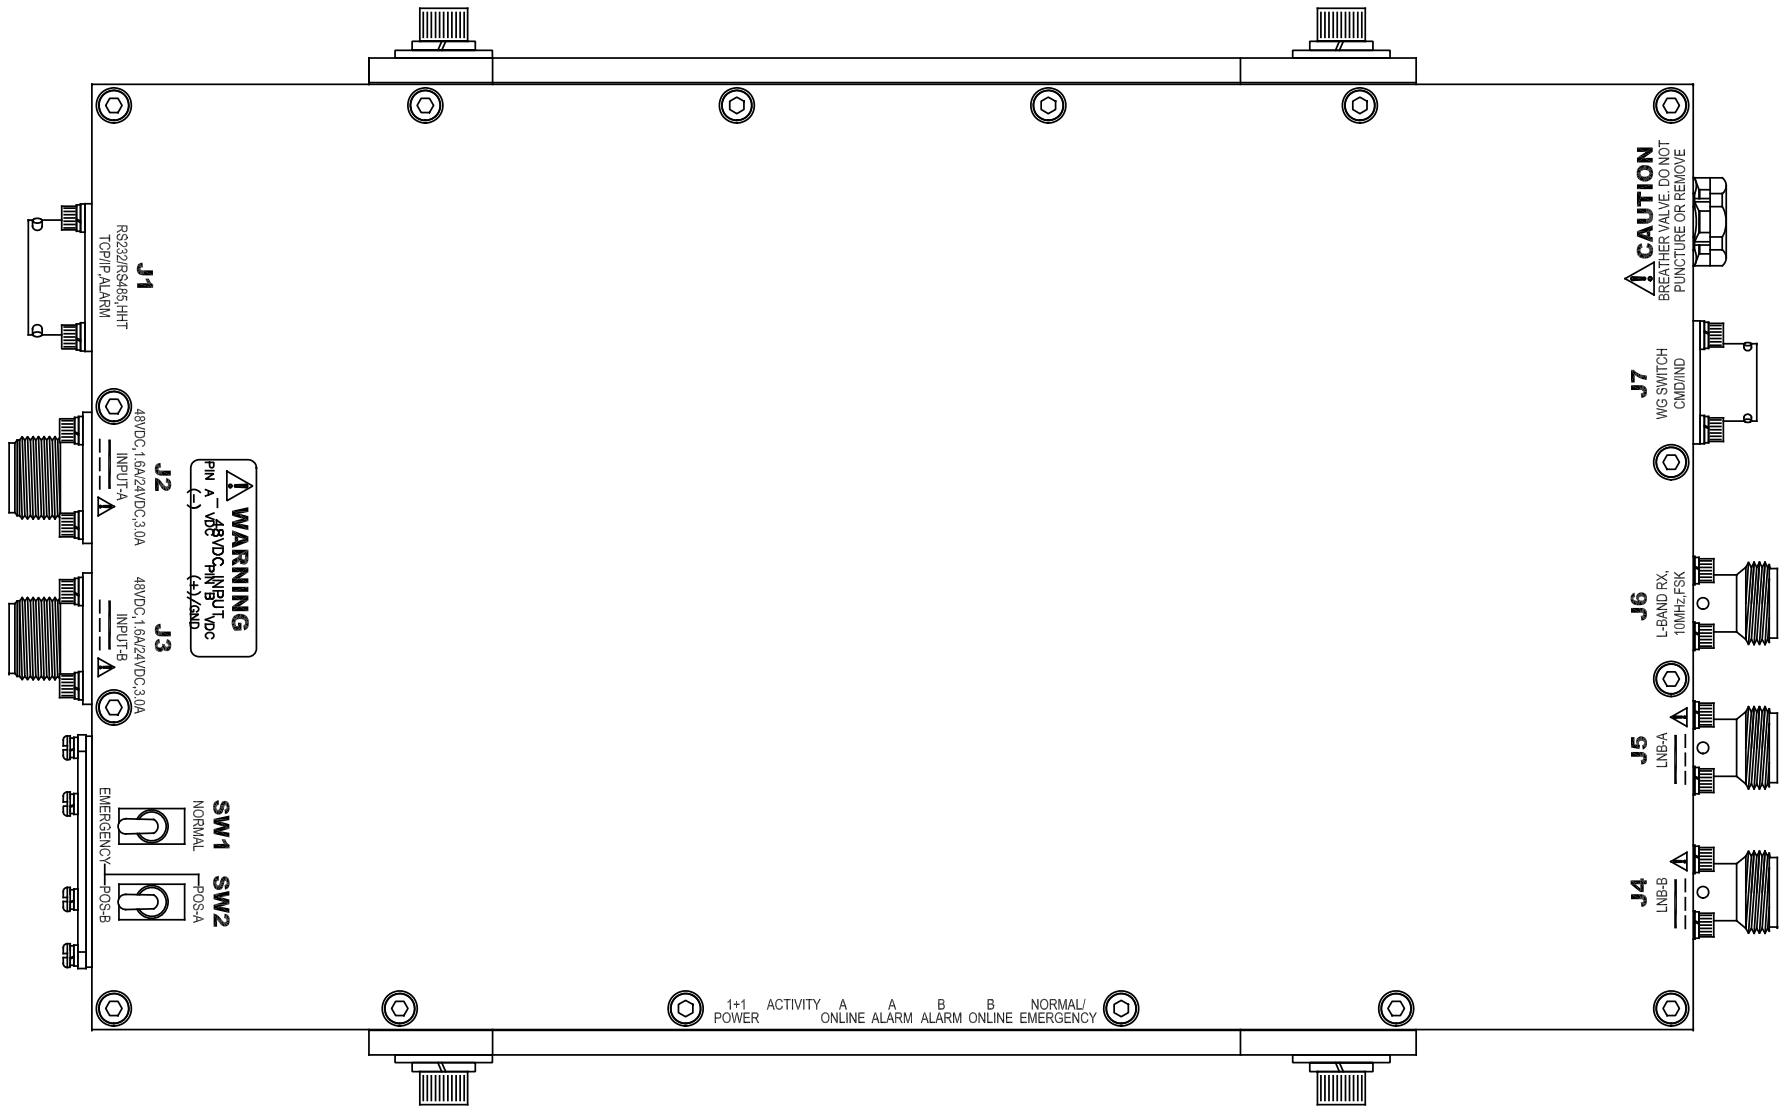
Top View of Rx 1+1 System Showing Connector Locations
